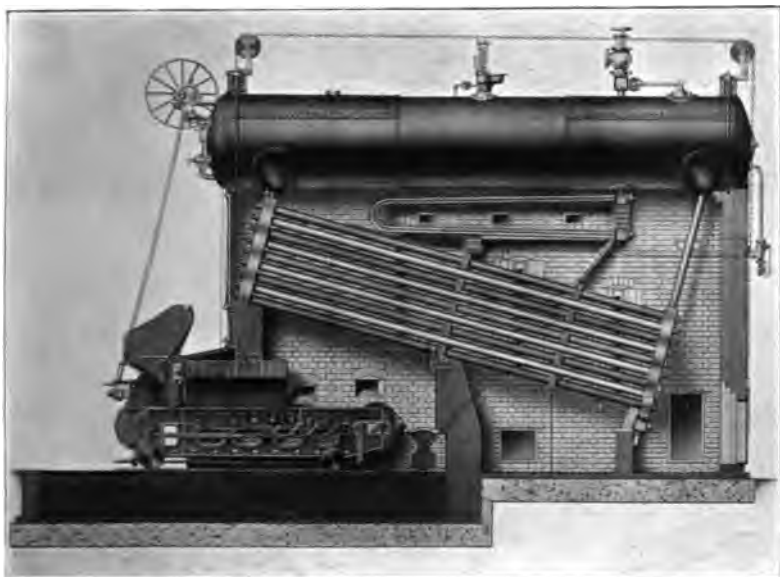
A.—Section of Babcock & Wilcox's Water Tube Boiler, with Chain Grate Stoker and Superheater. The Superheater is the Coil of Pipes above the Boiler Tubes.
